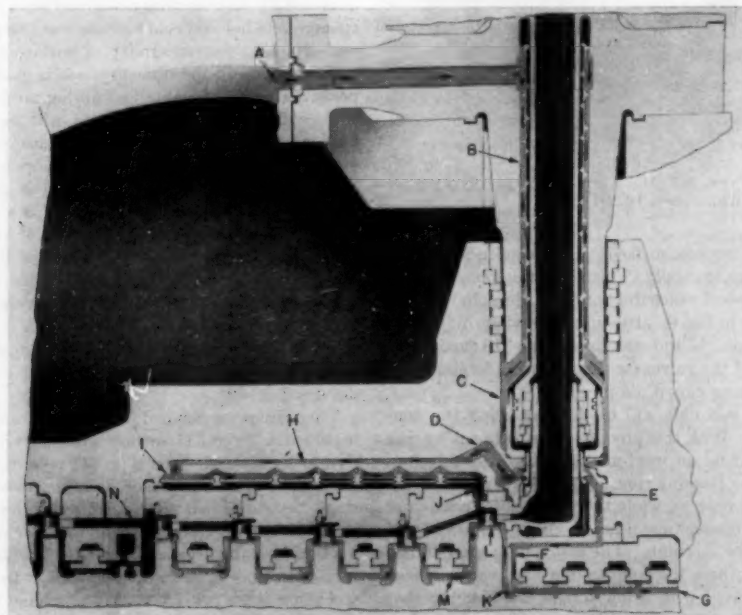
ENLARGED CROSS SECTION SHOWING PATH OF COOLING STEAM WITH ROTOR COOLING
